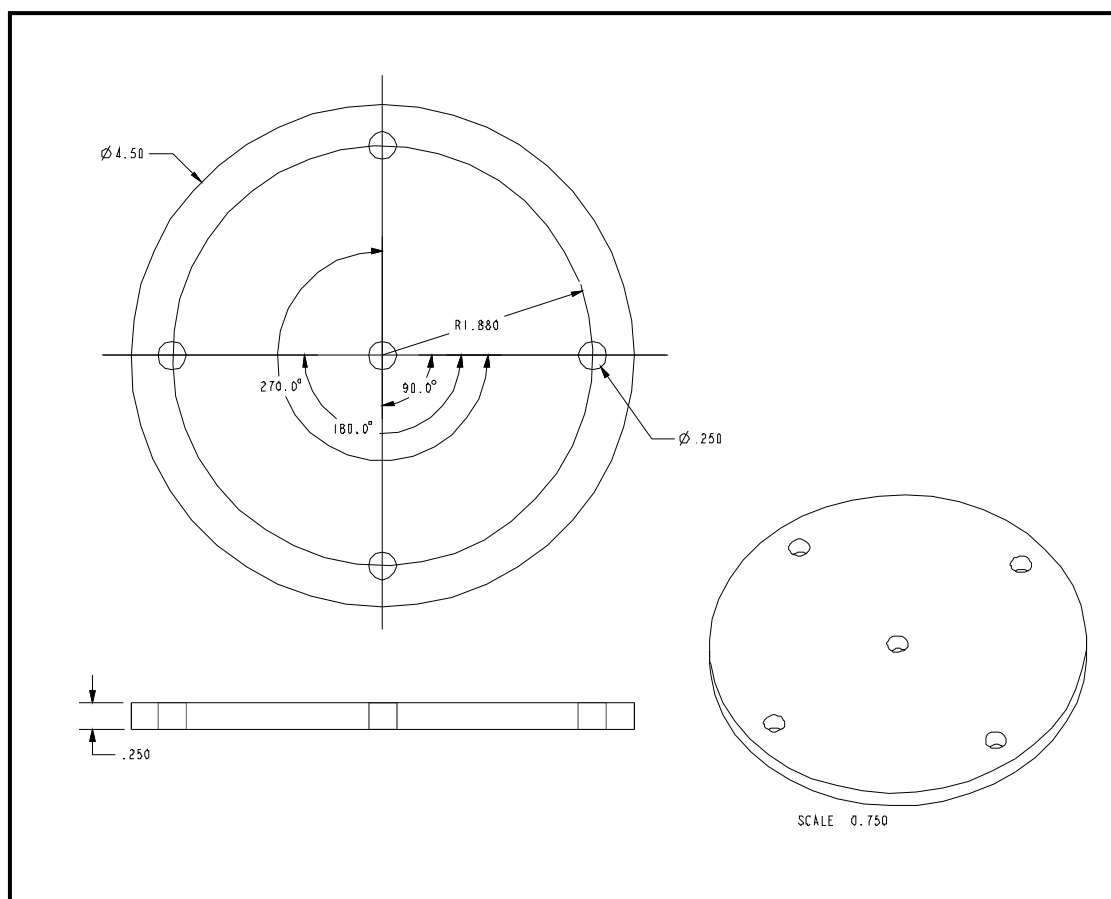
CAD Drawing of the Standard JSR Mold – Top Plate (Material: Stainless Steel, Filename: standardtop.drw).
